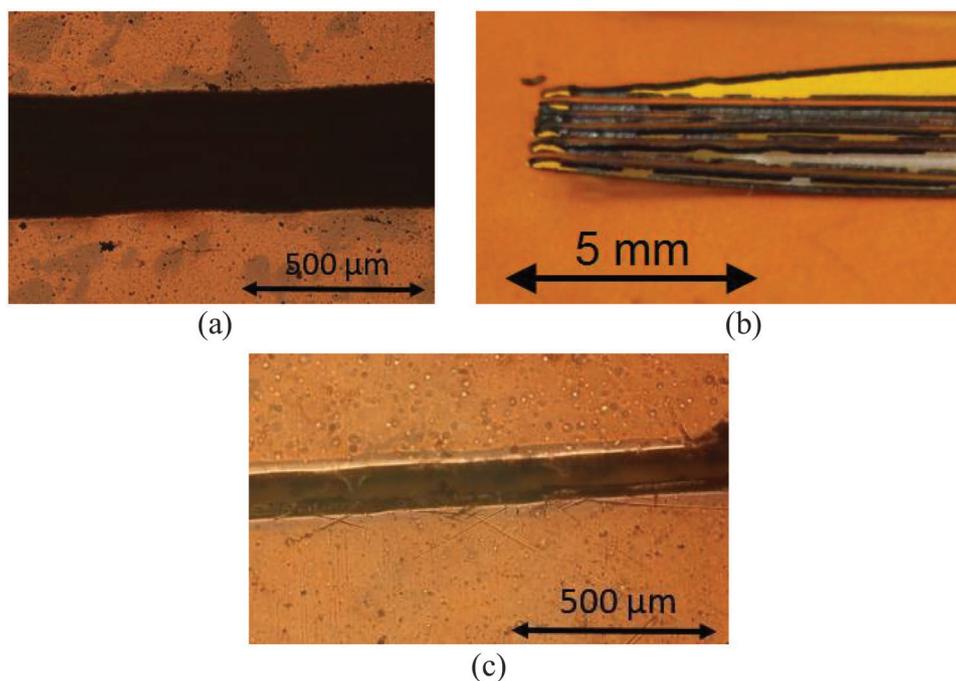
a) Example laser cut with best settings, 50% power, 100% speed, producing a 300 μm wide cut. b) Example of warping and excess carbon fouling from 0.25 mm laser cuts in Kapton and c) example Graphtec cut at 300 mm s⁻¹ with a force setting of 14, producing a 100 μm wide cut.
